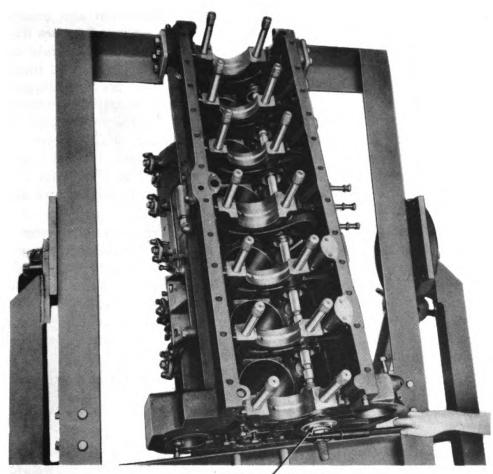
Installing Cylinder Bore Liner, Using Puller (41-P-2907-117) and Adapters (41-A-18-73)
